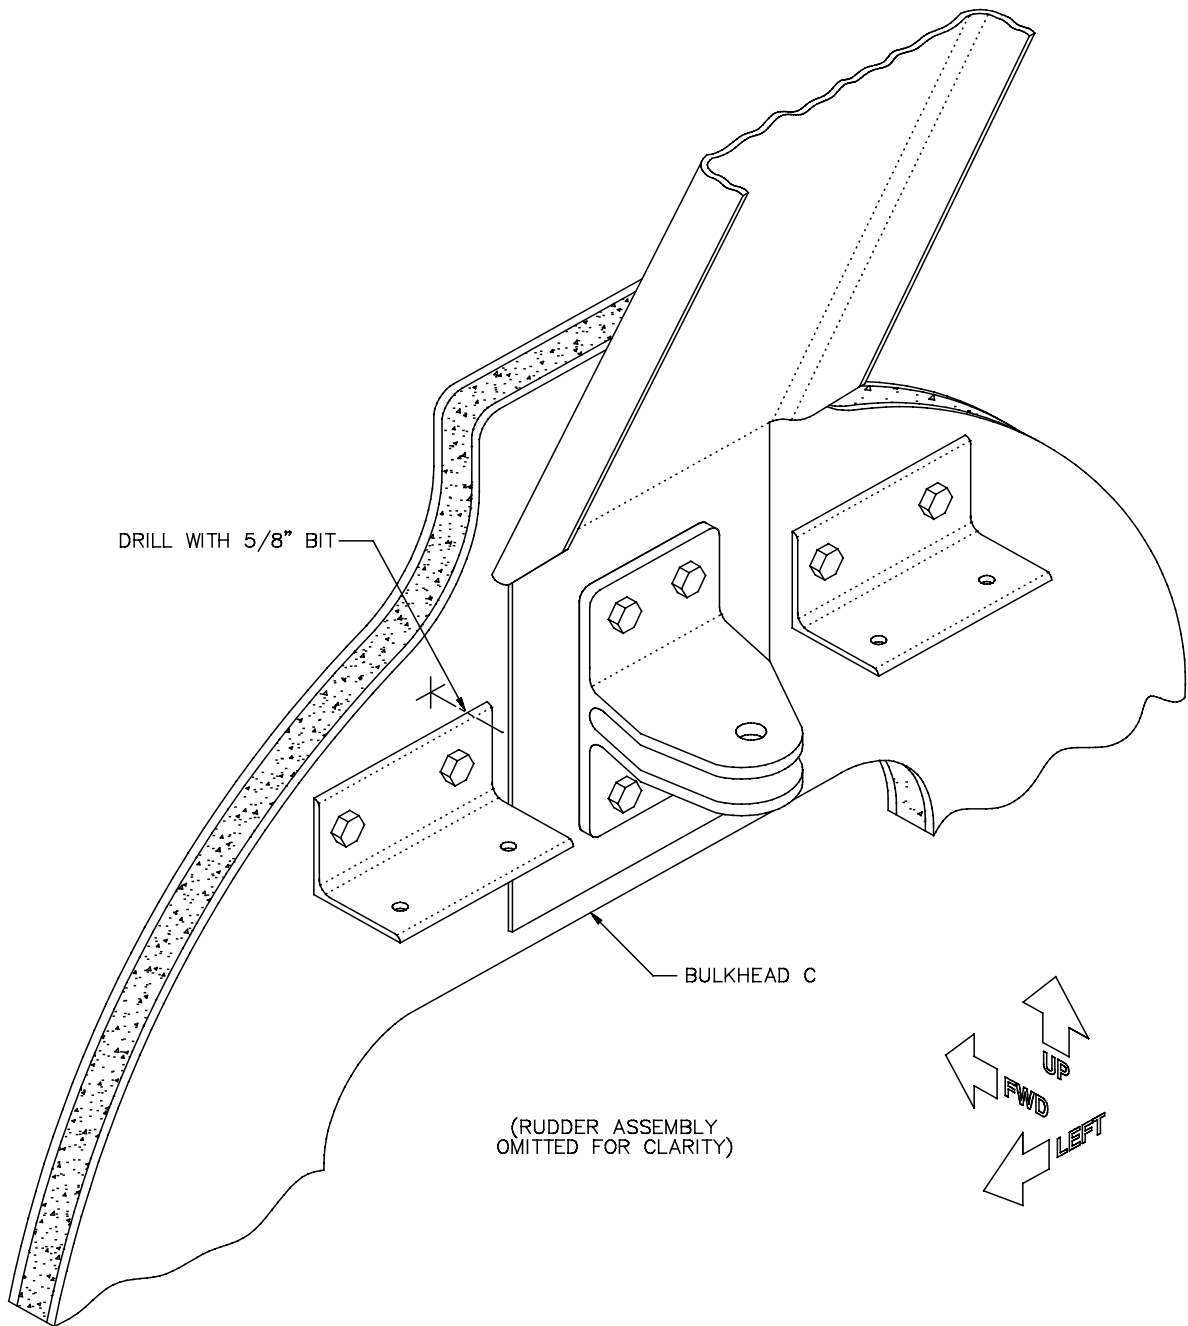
Drilling the Trim Cable Hole Through Bulkhead C
